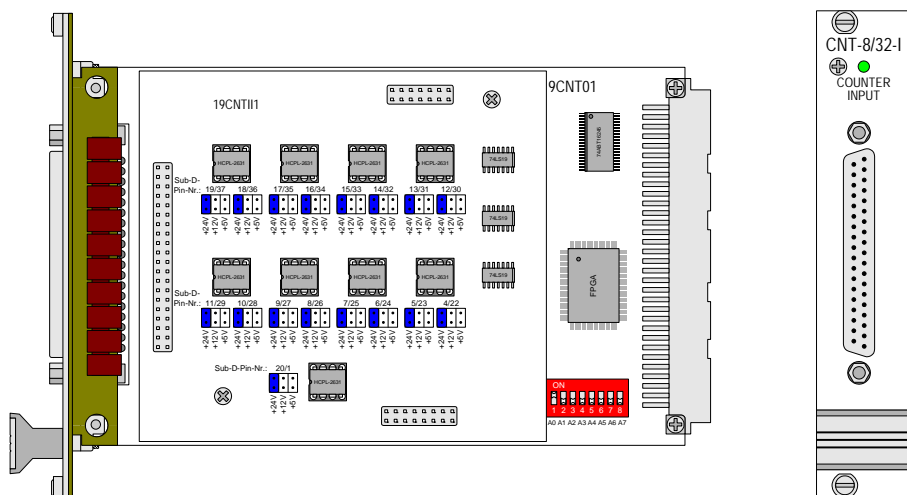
Pro-CNT-8/32-I REVA: Board and front panel
